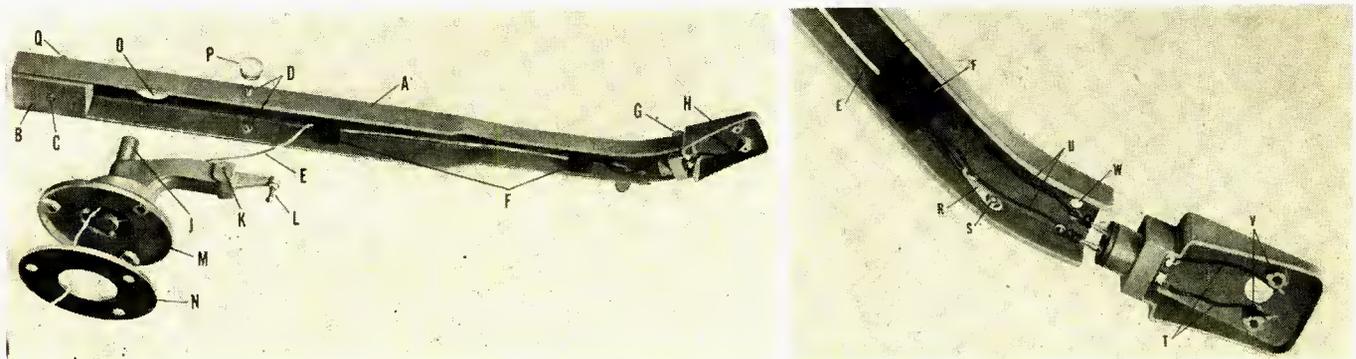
(left). Constructional details of the Audax arm. Following the instructions carefully will enable anyone to assemble it in less than ten minutes. Fig. 6 (right). Details of the head assembly.
